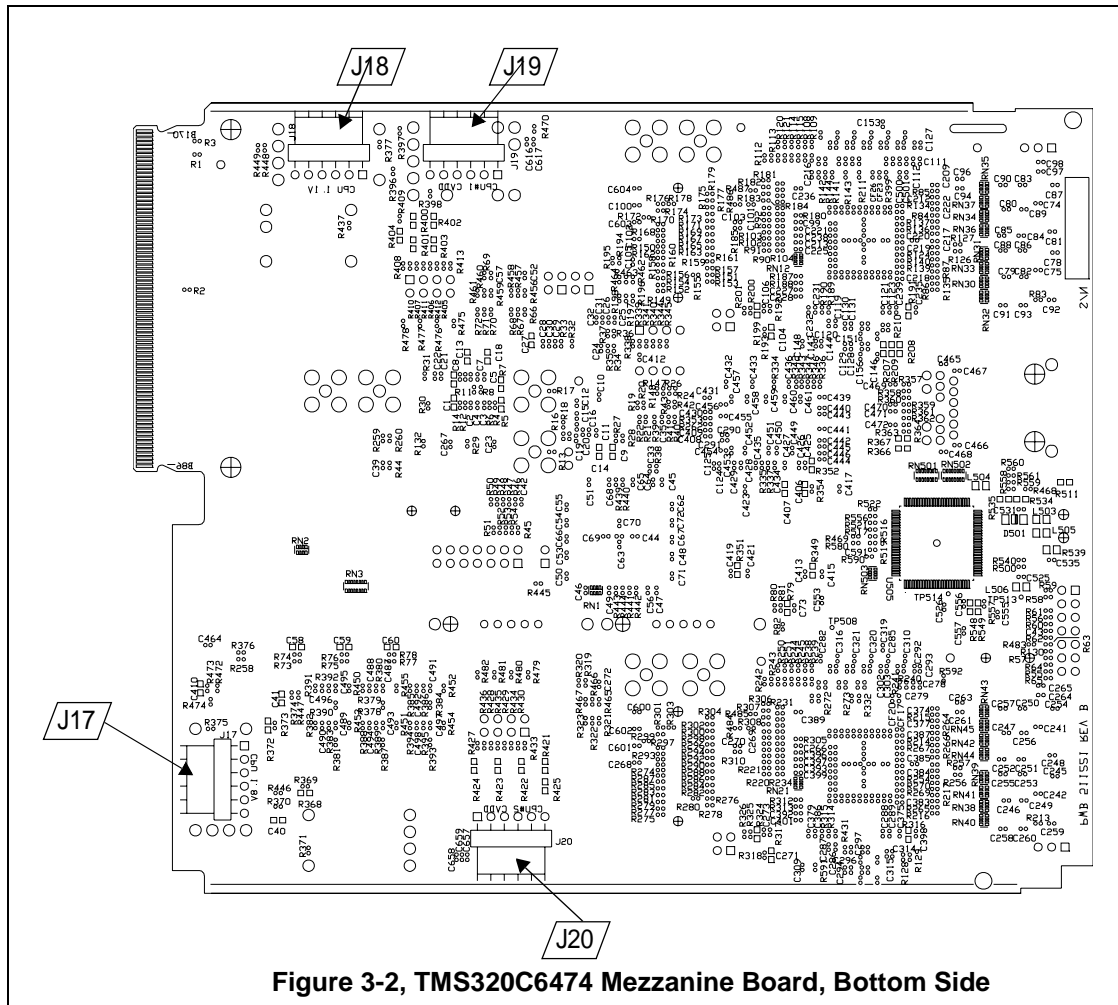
, TMS320C6474 Mezzanine Board, Bottom Side
